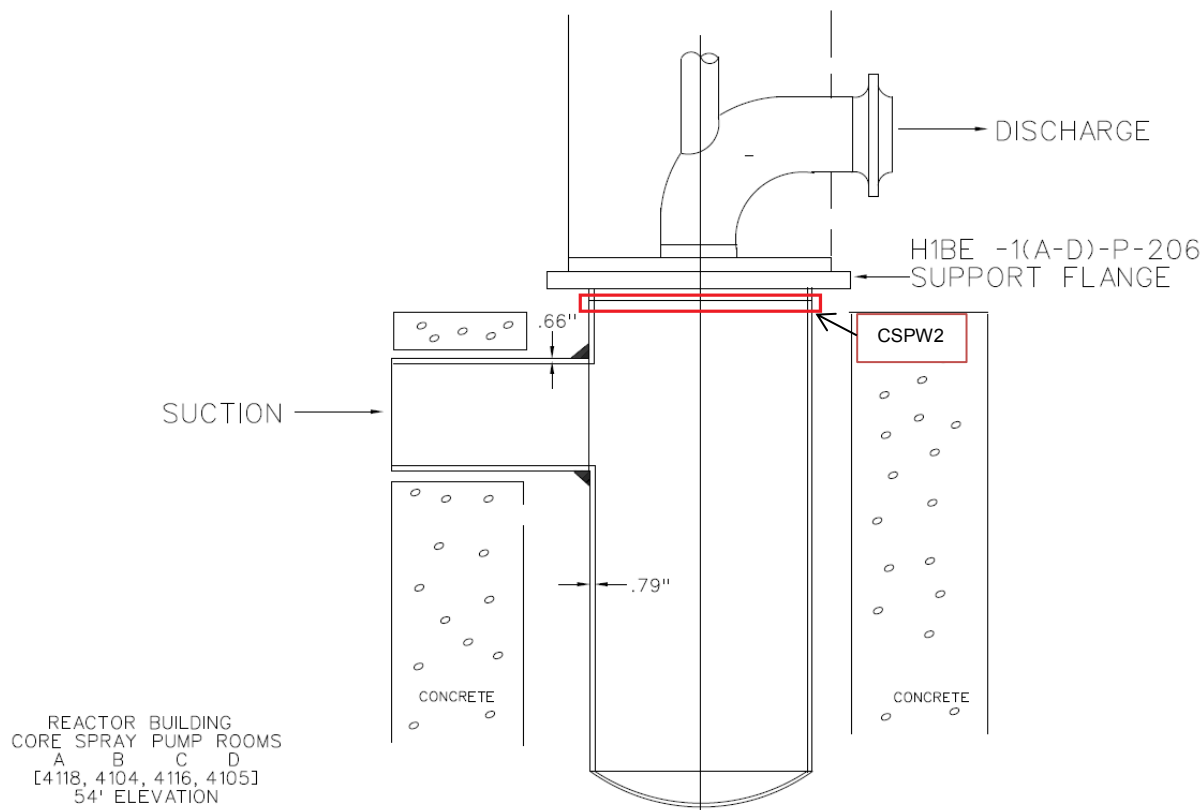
Weld 1-CP-206-CSP-W2 (Extracted from Reference DWG B-2)
